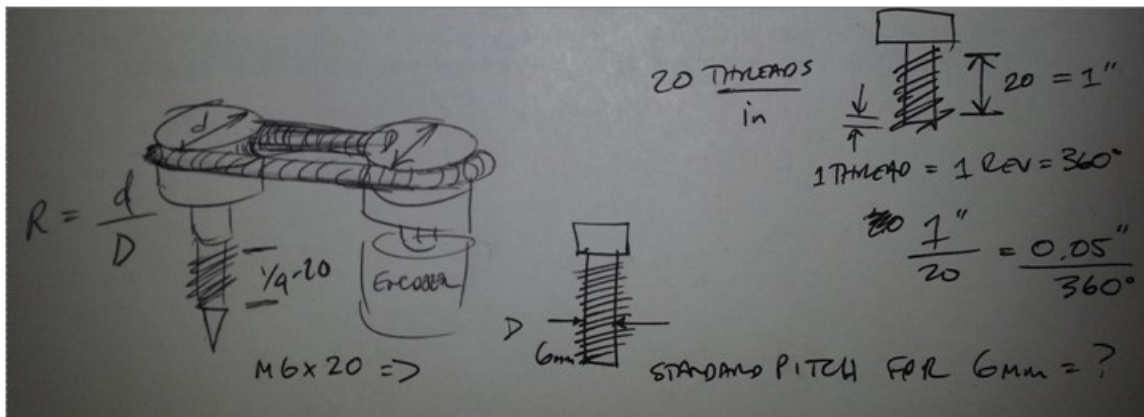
Sketch showing some of the key dimensions to determining carburetor fuel needle valve position.
